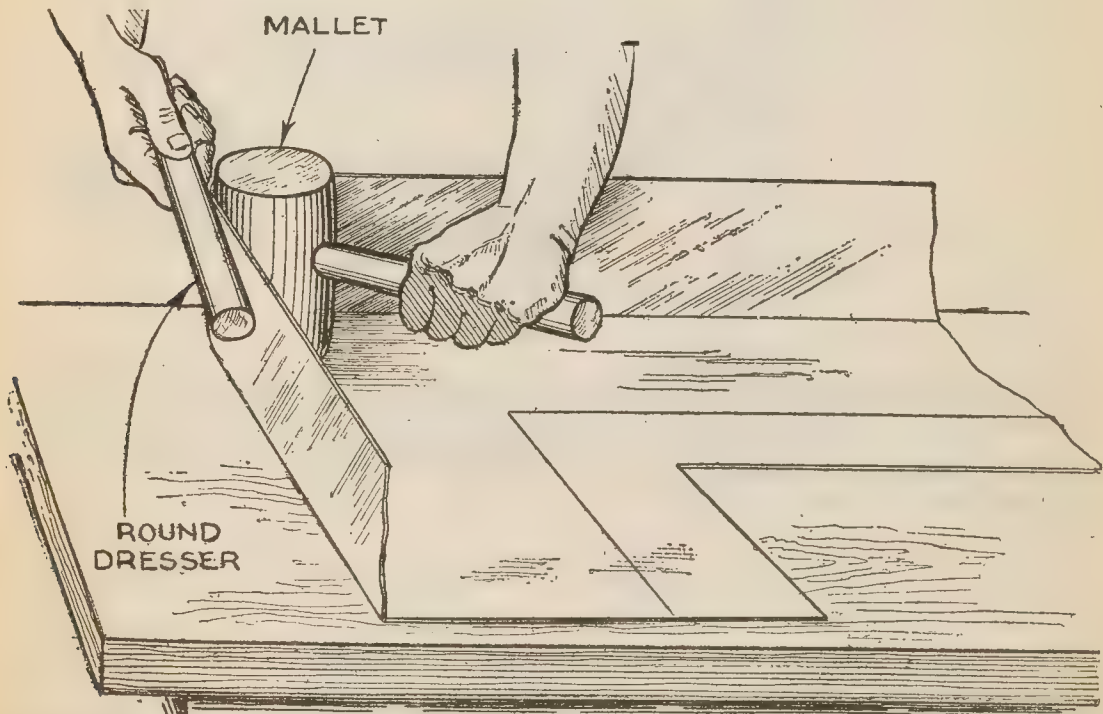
,547.—*Beating box gutter corner, 4.* Bring up external corner to 90° with bottom of gutter by beating against mallet; second step.
